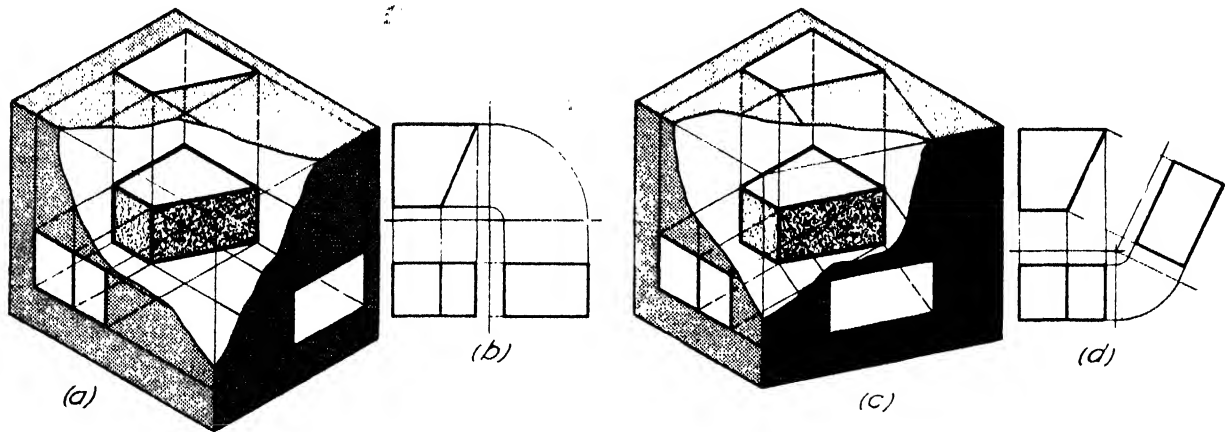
Auxiliary plane perpendicular to the horizontal plane.
